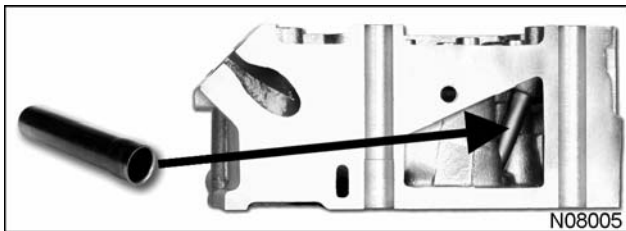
Cutaway of cylinder head showing glow plug sleeve
